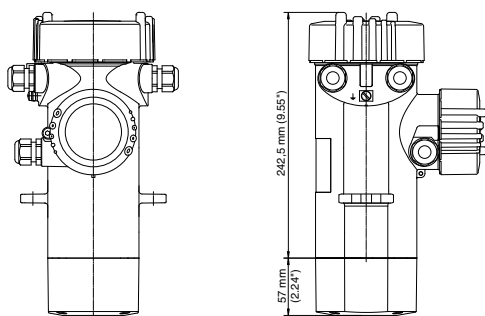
Aluminium housing or stainless steel housing - Precision casting
